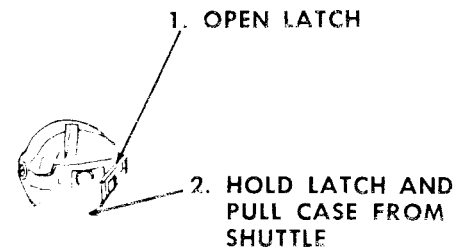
Removing Bobbin Case and Bobbin from Machine
